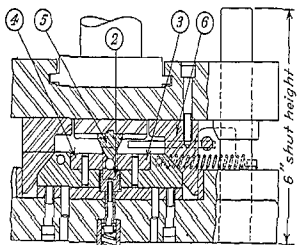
Hinged-horn die for forming a rectangular part. (Harig Mfg. Corp.)
